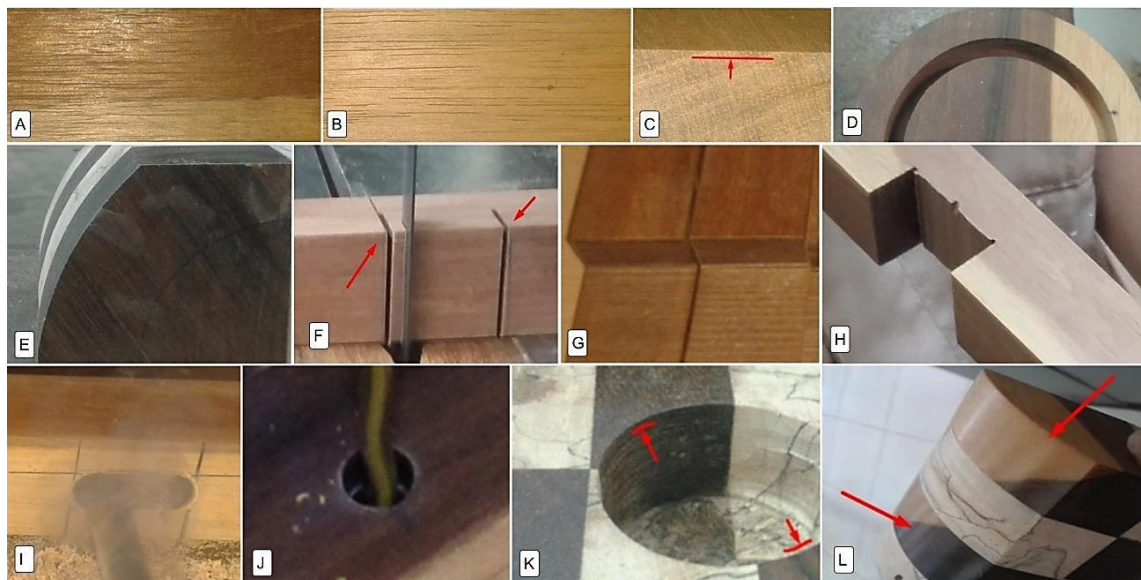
Finishing the surfaces of Piãozinho wood in machining processes
